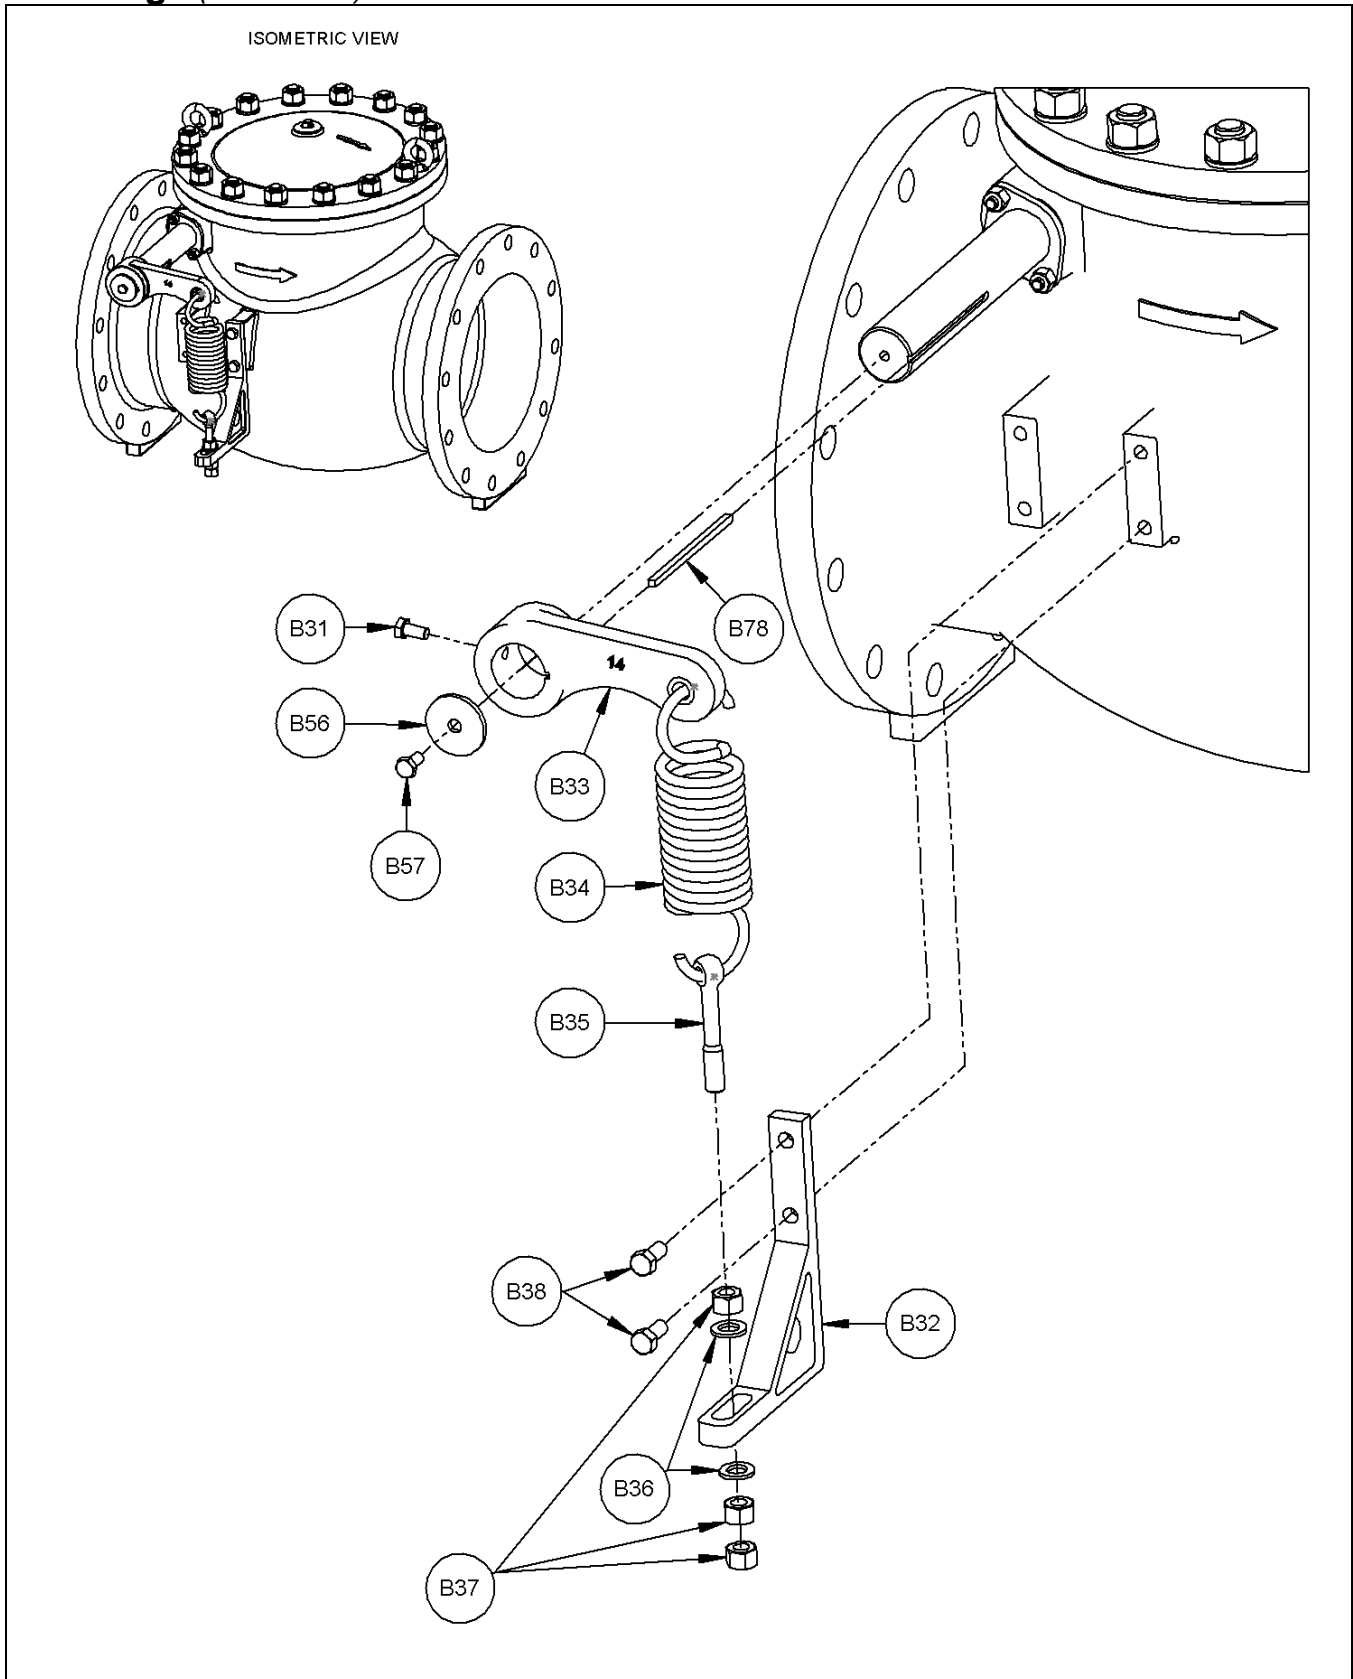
CVS-EDV Swing Check Valve (Lever & Spring 3-14")
